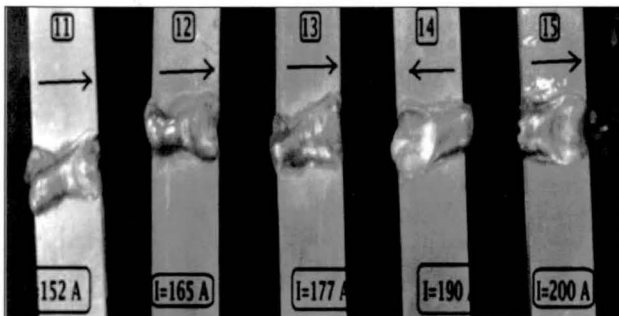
Weld beads at welding speed 110 mm/min.
